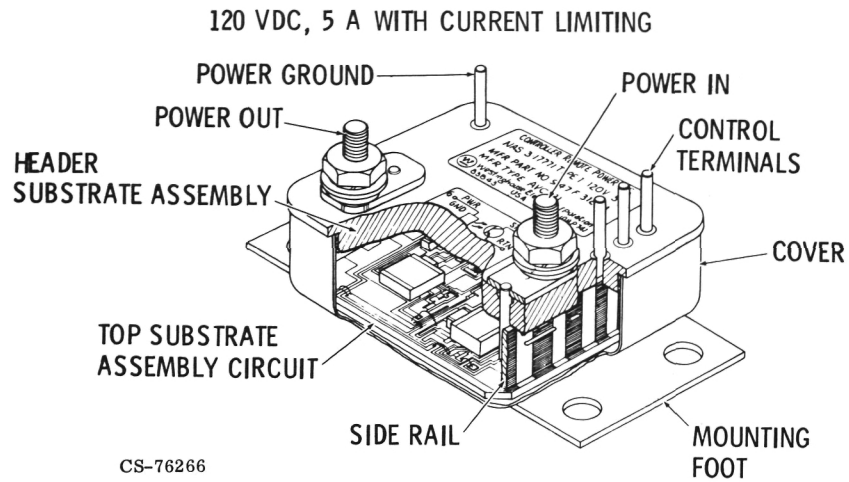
Cutaway view of a packaged, hybrid 120 V dc remote power controller.
